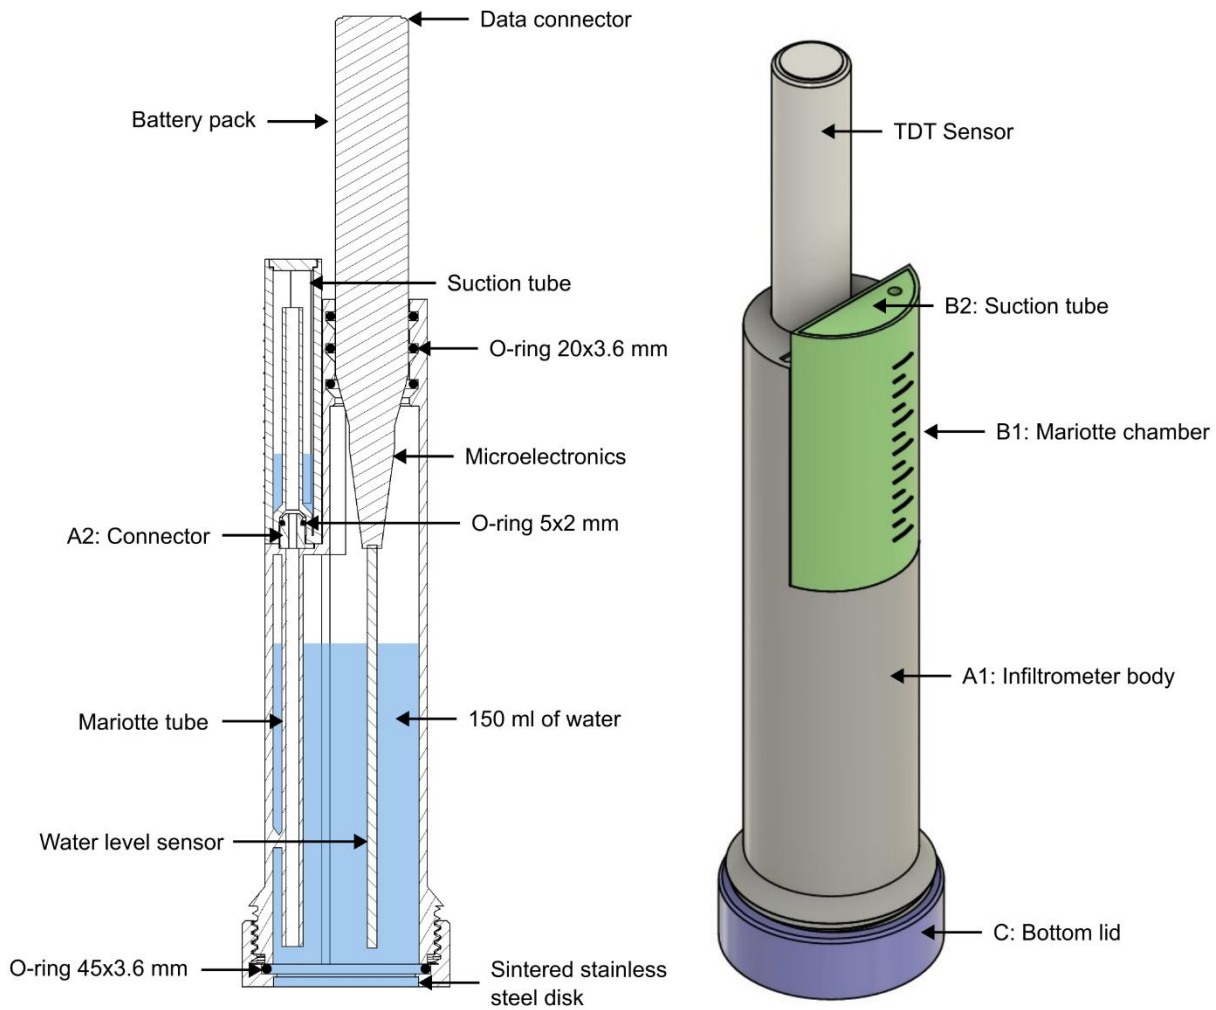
Cross section and visualization of the 3D printed AMDI, parts denoted A, B, and C are 3D printed using FDM technology.
